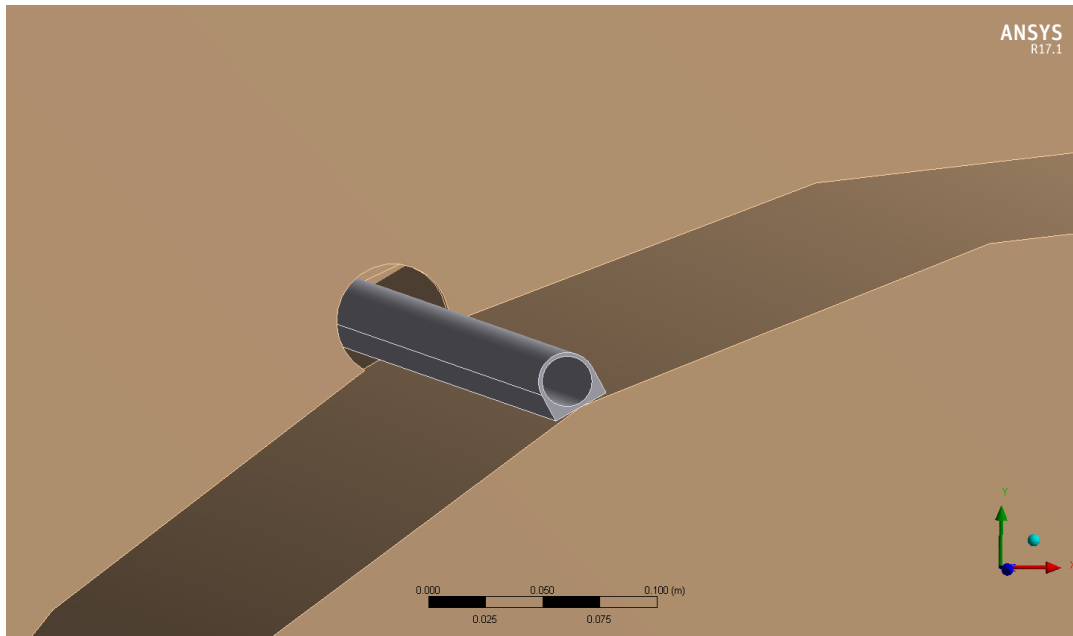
Detail of a tube connected to the shield by welding.
